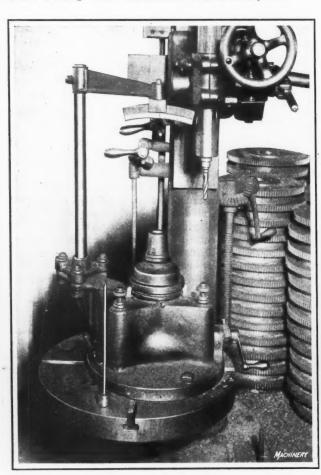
Ball Type of Balancing Fixture used for Flywheels
